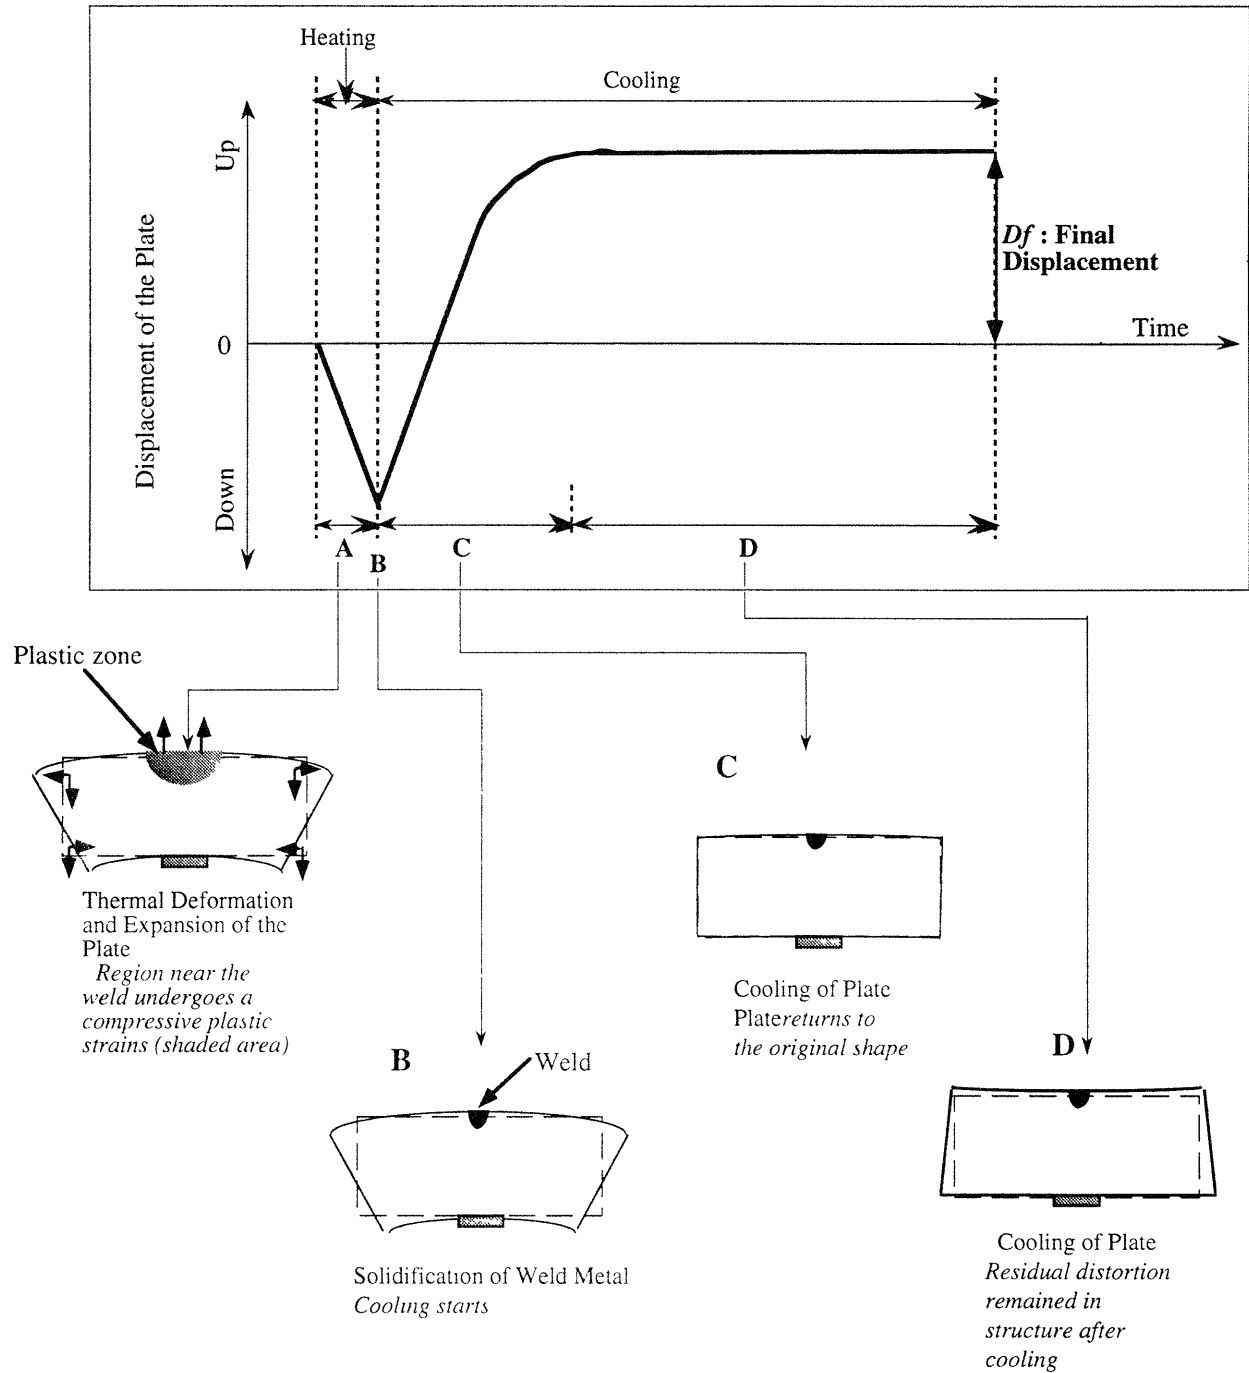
The formation of deformation due to welding for plane geometry
